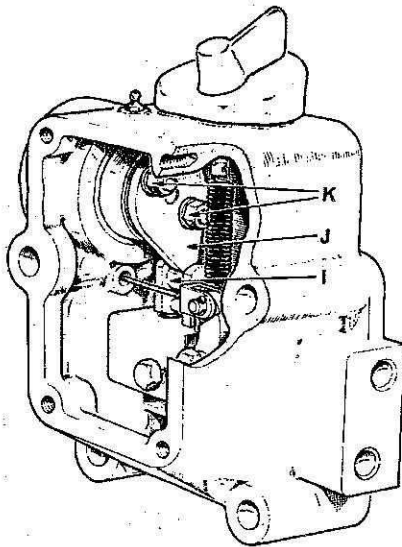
Adjusting rocker shaft cam; refer to text for adjustment procedure and specifications.
